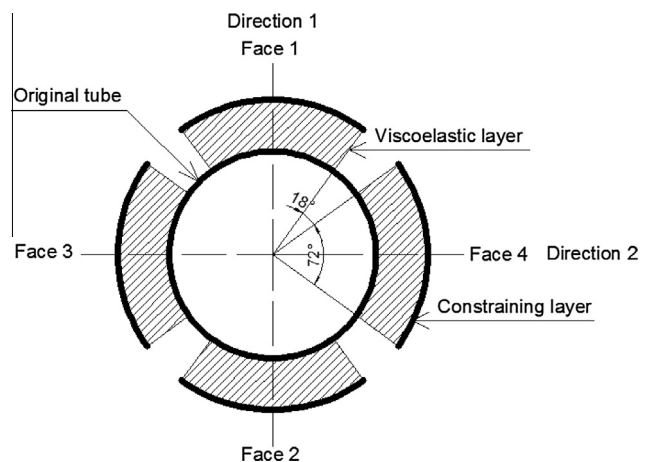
Tubular cross section of the sandwich beam structure (not to scale, after [16]).
